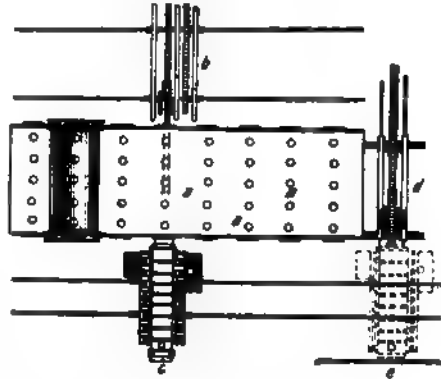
General Arrangement showing an Installation of the Moore Machine.
